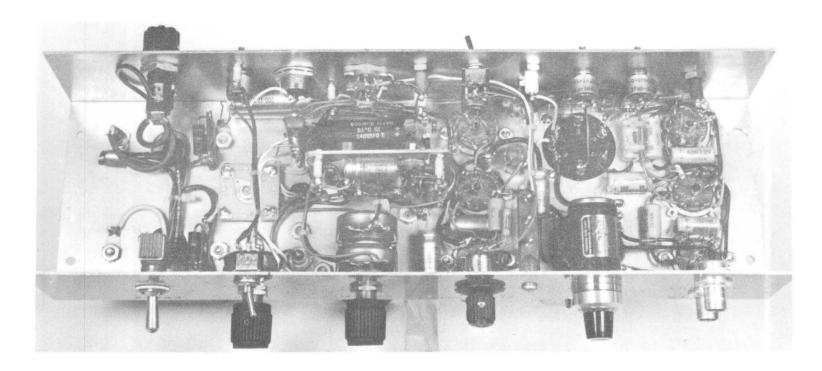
Bottom front view of af unit showing components and wiring not visible in Fig. 13.
